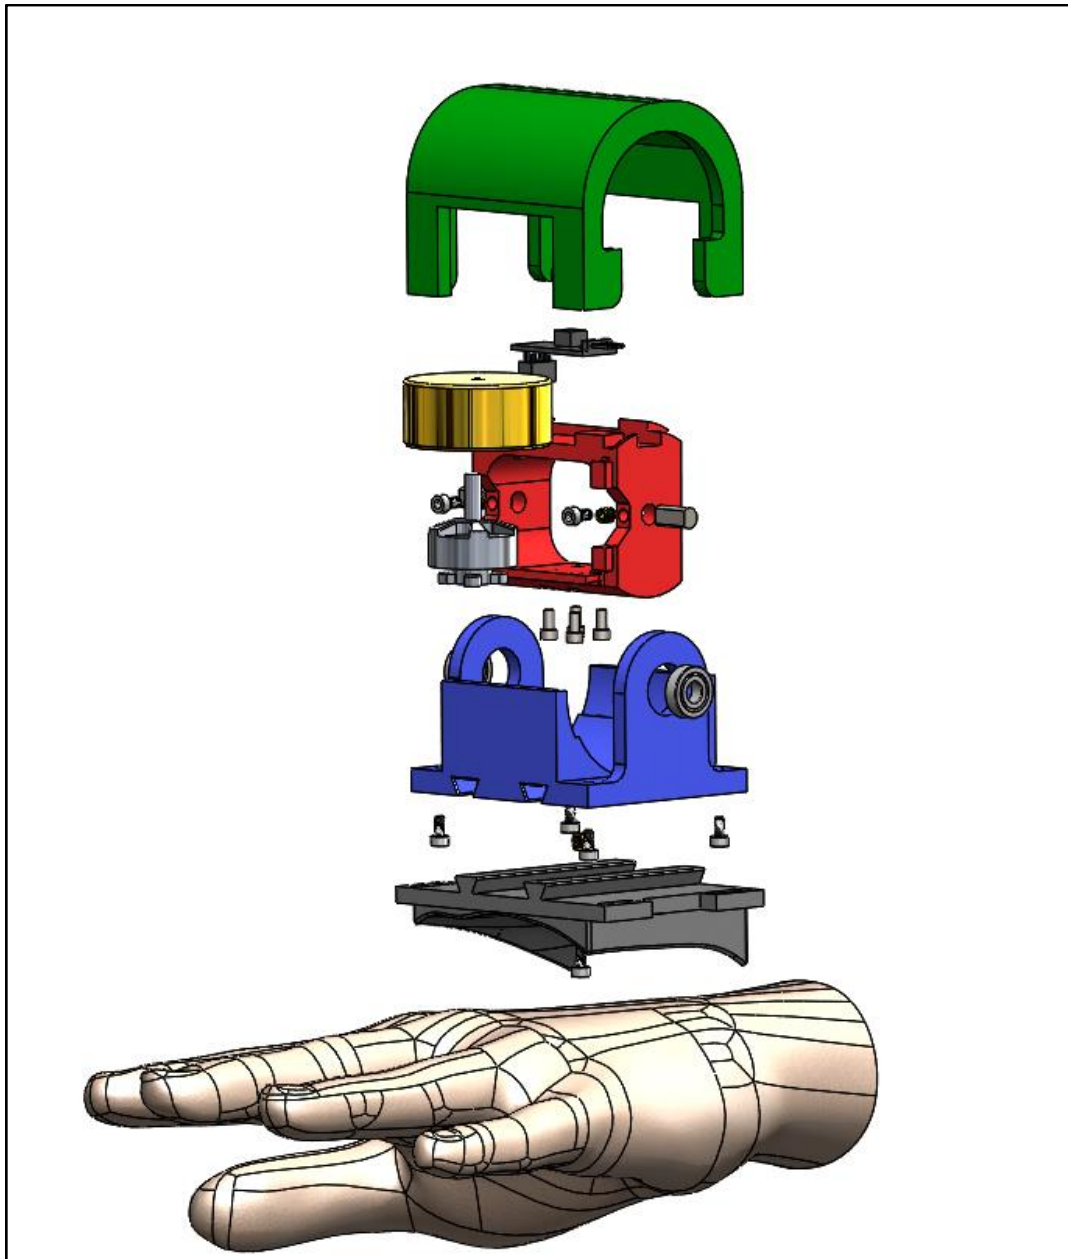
EXPLODED VIEW OF FINAL ASSEMBLY
